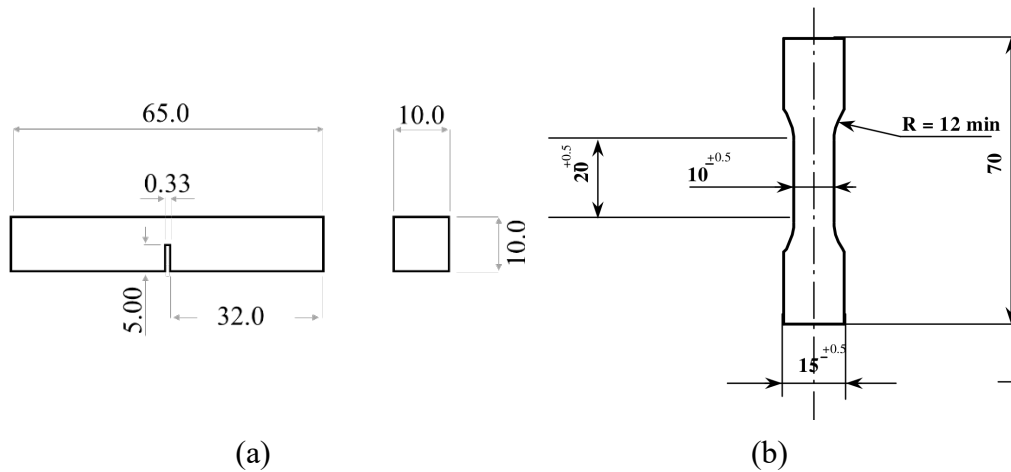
Illustration of the sample geometry for: (a) single edge notched bending tests and (b) tensile tests. All dimensions are in mm.
